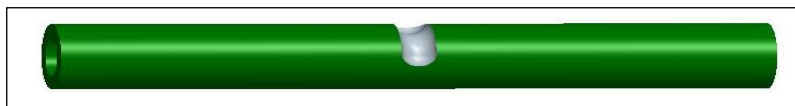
Steel pipe specimen containing a dish-shaped defect.
